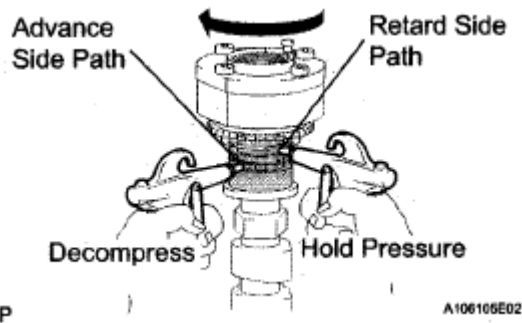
Checking Camshaft Timing Exhaust Gear Turns In Retard Direction
